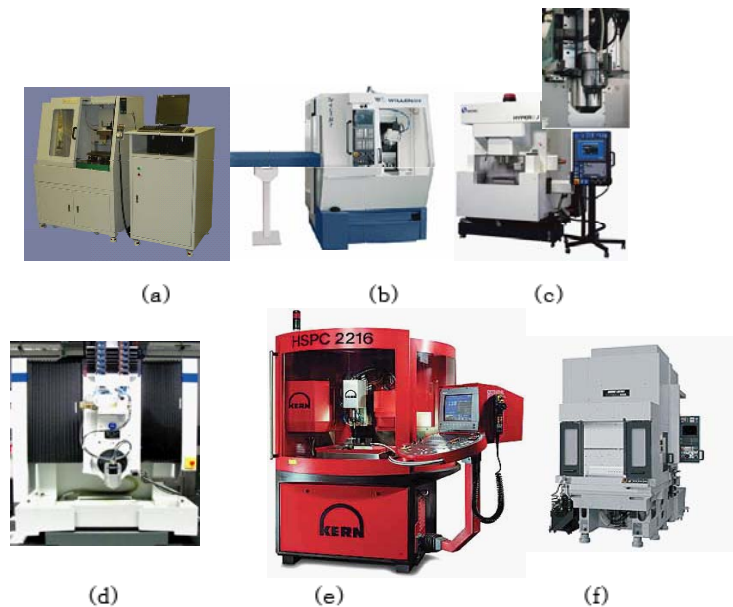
Commercial Ultra Precision Machine Tools: (a) DT-110 [Mikrotool Pte LTD]; (b) W-408MT [Willemin-Macodel SA]; (c) Hyper2j [Makino]; (d) Kugler [Kugler of America]; (e) HSPC 2216 [Kern]; (f) ULTIMILL V3000 [Mori Seiki]
